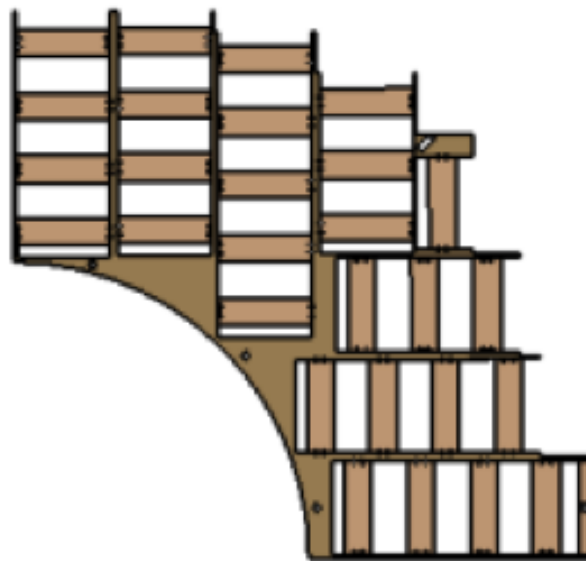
Drawing of inner support unit with holes for fixation on the cooling plate
